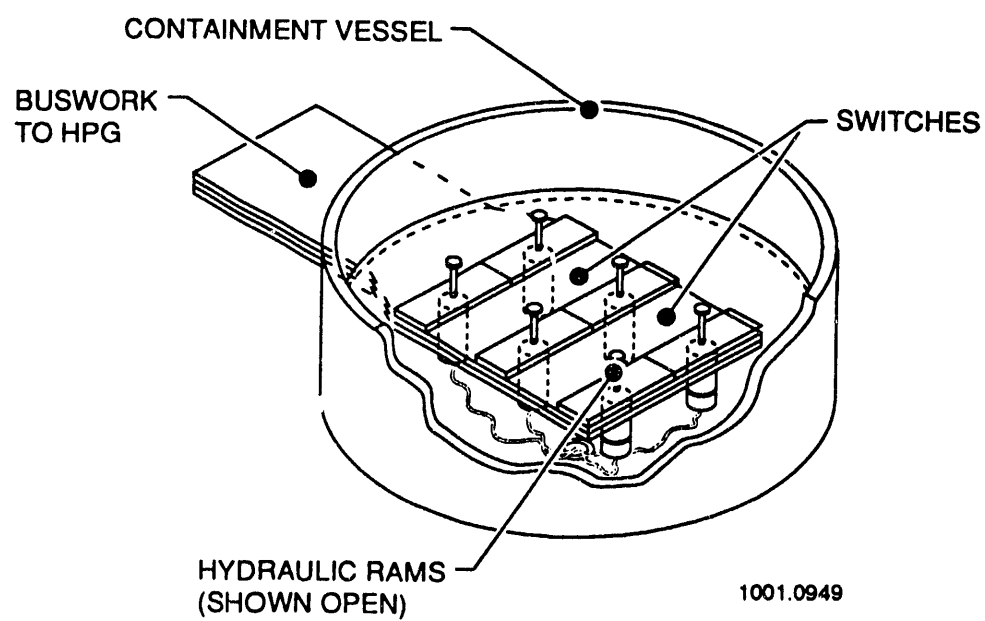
Inside containment vessel hydraulic ram, cutaway view
